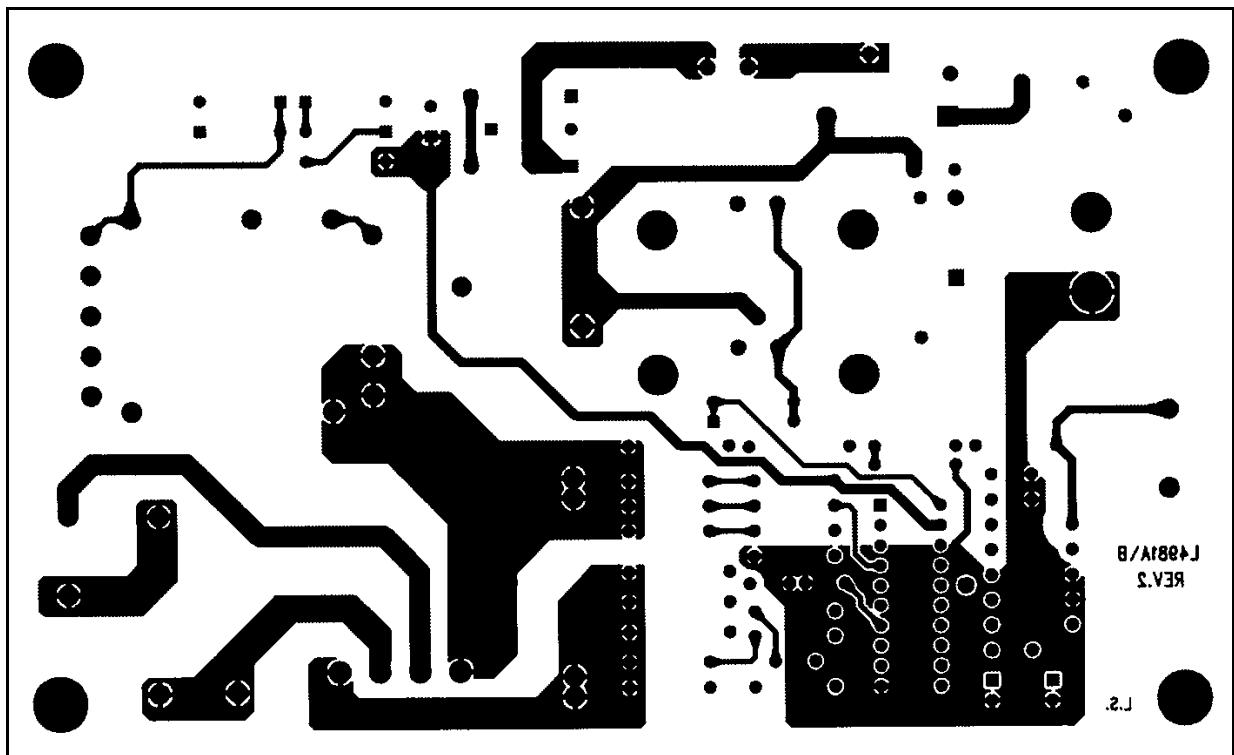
P.C.B. Solder Side (Dimensions 88 x 150mm).
